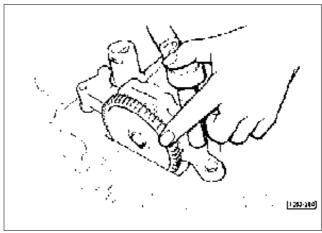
SILVER 100.6* ONLY - Tighten the engine oil pump securing screws to the specified torque;
